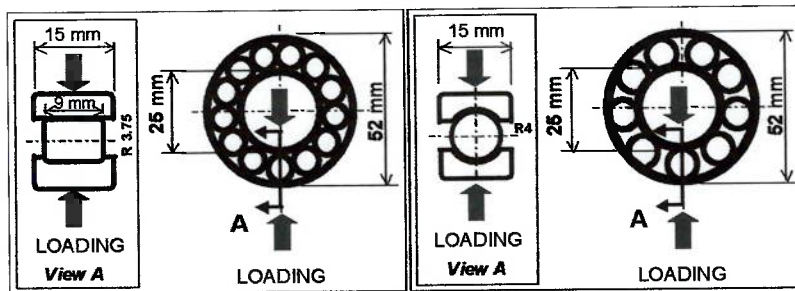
Geometry of roller and ball bearings (no. NU205 and 6205).
